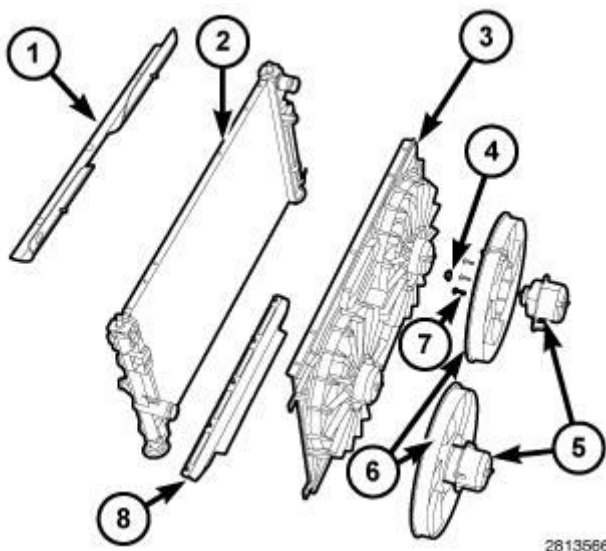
Lower, Fan Blade Retaining Nut & Fan Motor
